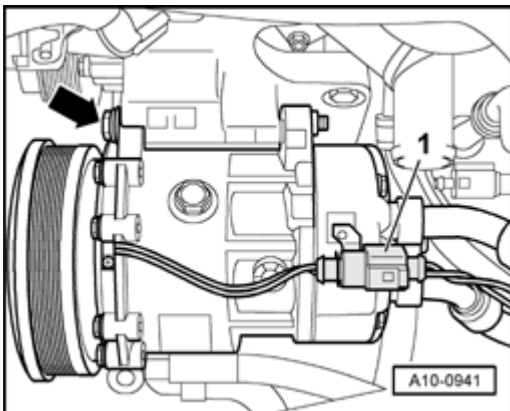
Disconnecting Electrical Connector For Air Conditioning Compressor Clutch
